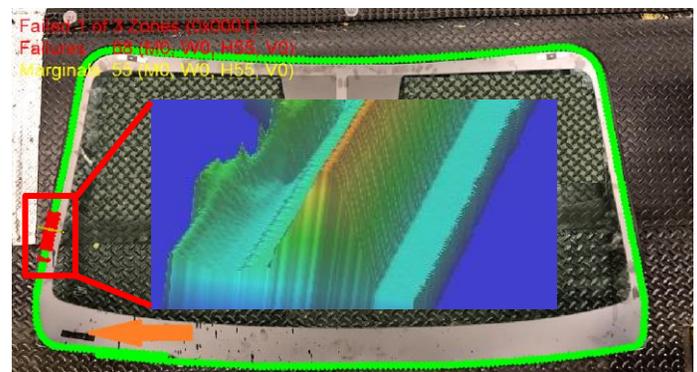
Inspection Result and 3D view of urethane bead on windshield
